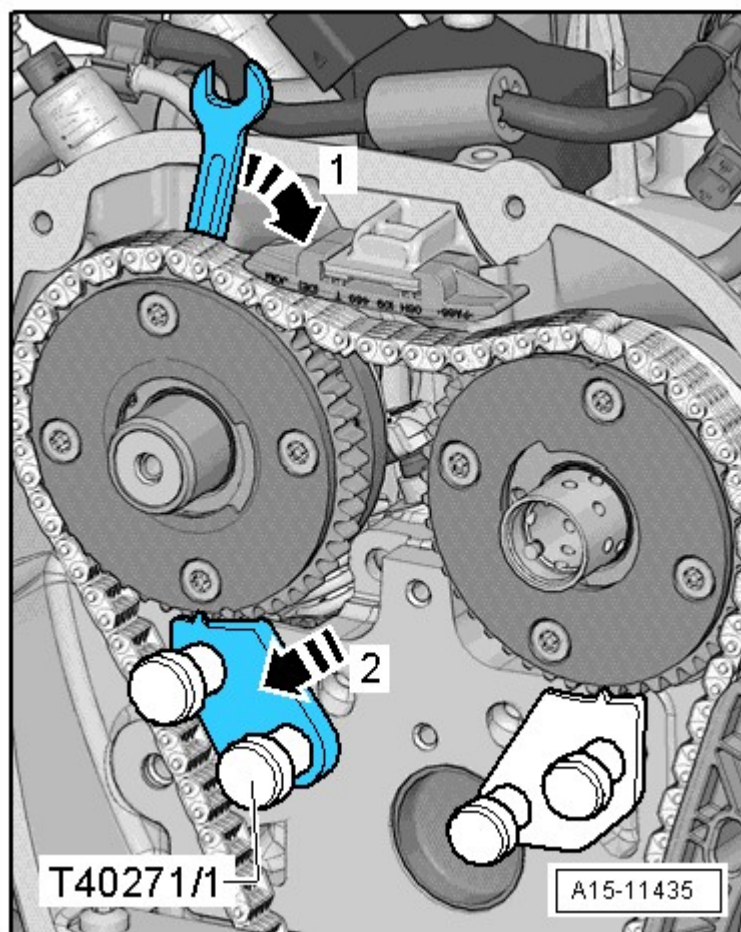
Turning Exhaust Camshaft In Direction Of Arrow
